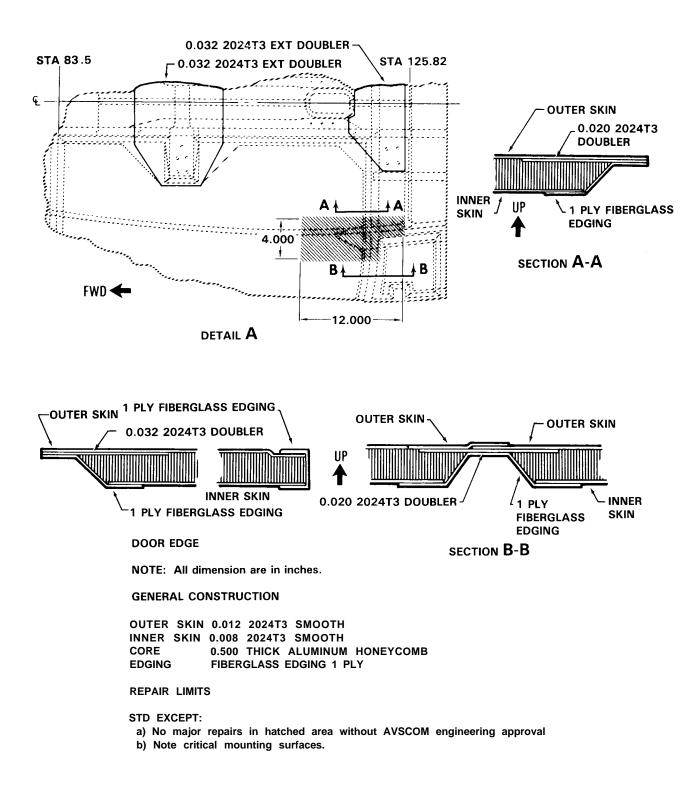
Honeycomb Panels — Upper Cabin Roof Repair (Sheet 2)
